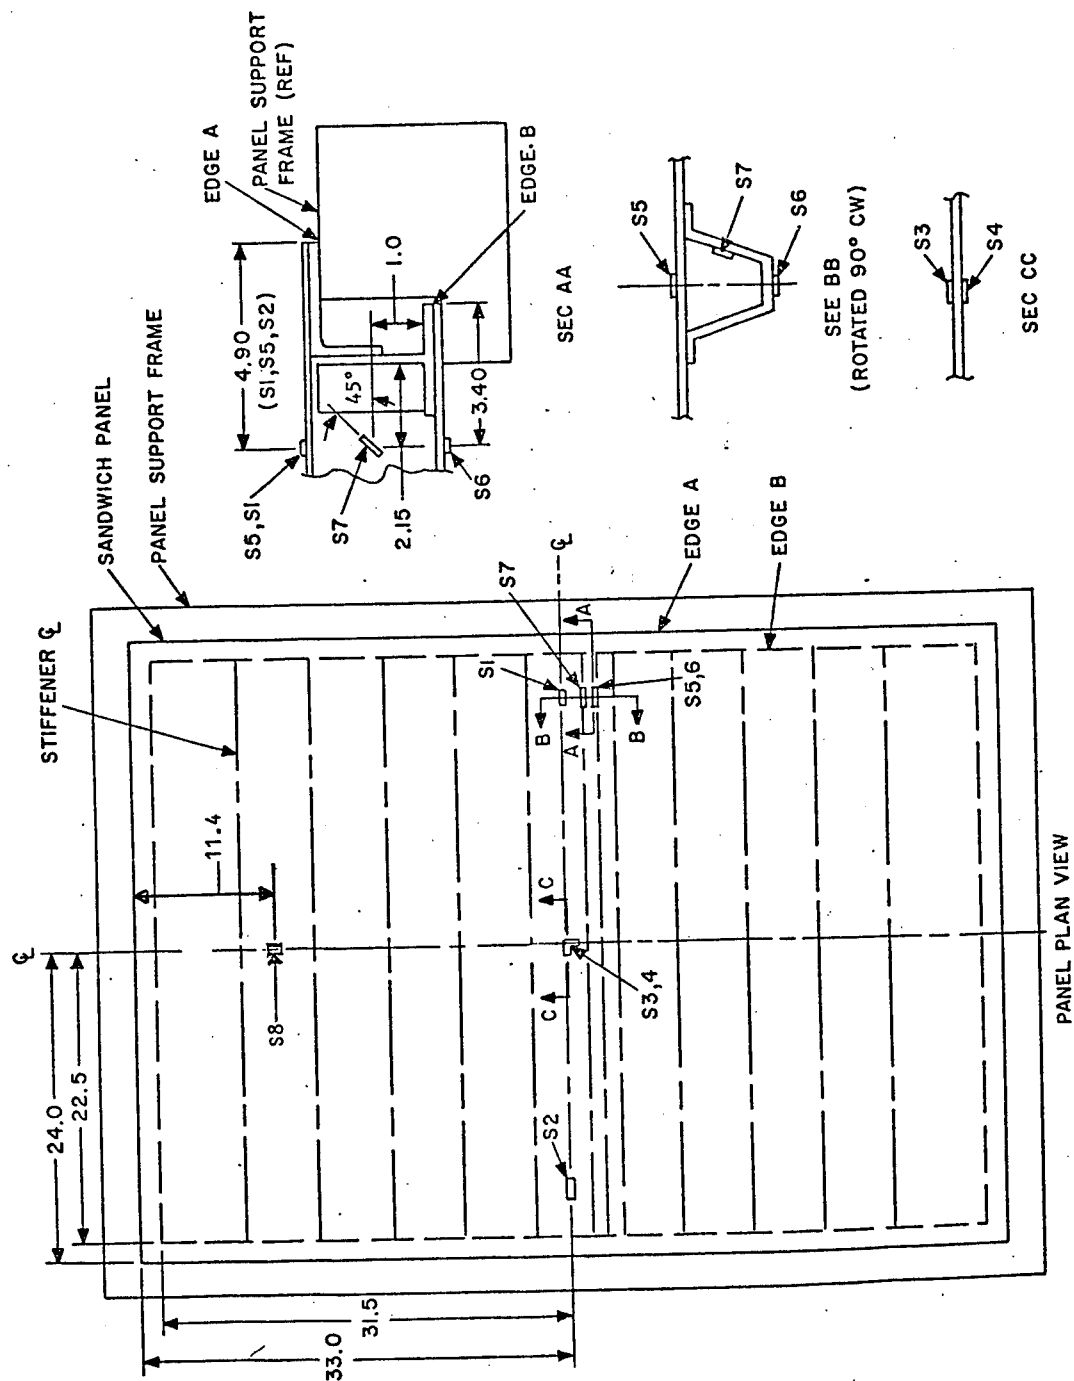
Graphite/Epoxy Hat-Stiffened Panel Fabrication and Instrumentation Details
